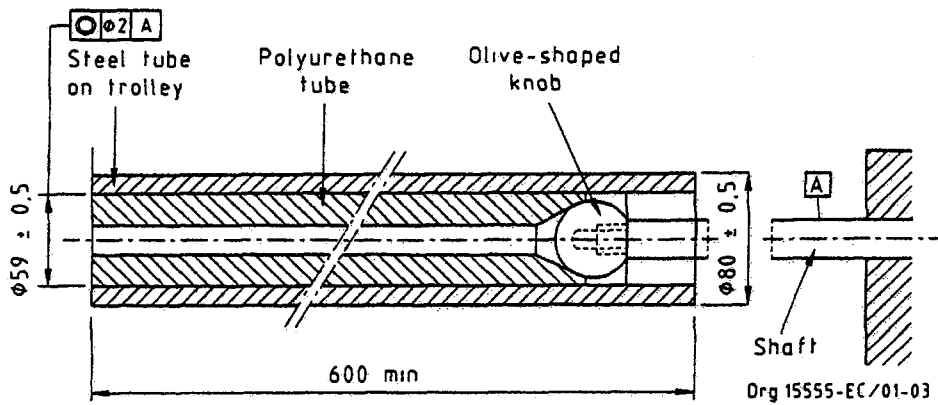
Stopping device (assembled) — Rear impact dimensions
